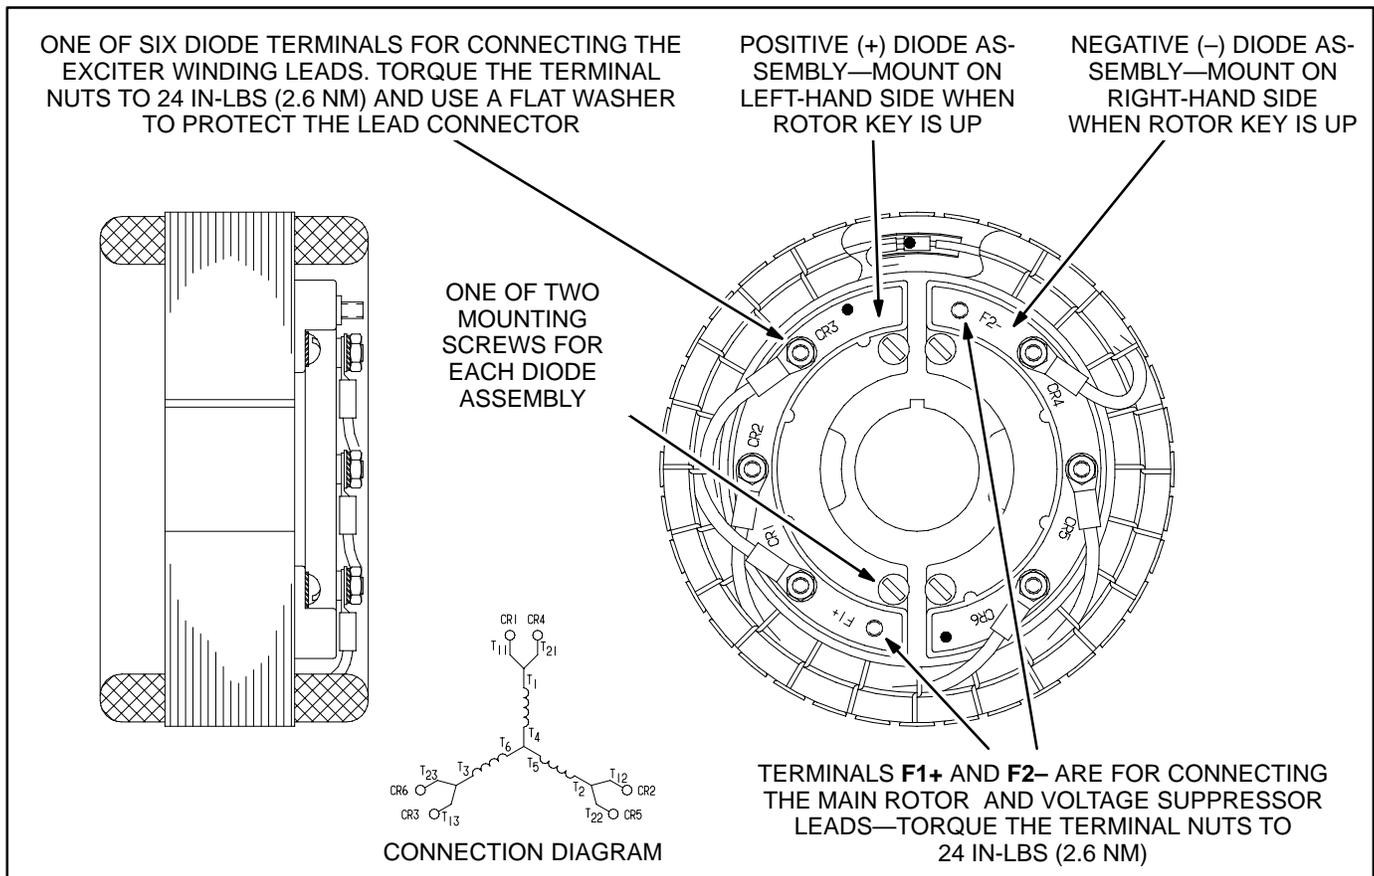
TESTING THE ROTATING RECTIFIER ASSEMBLY
